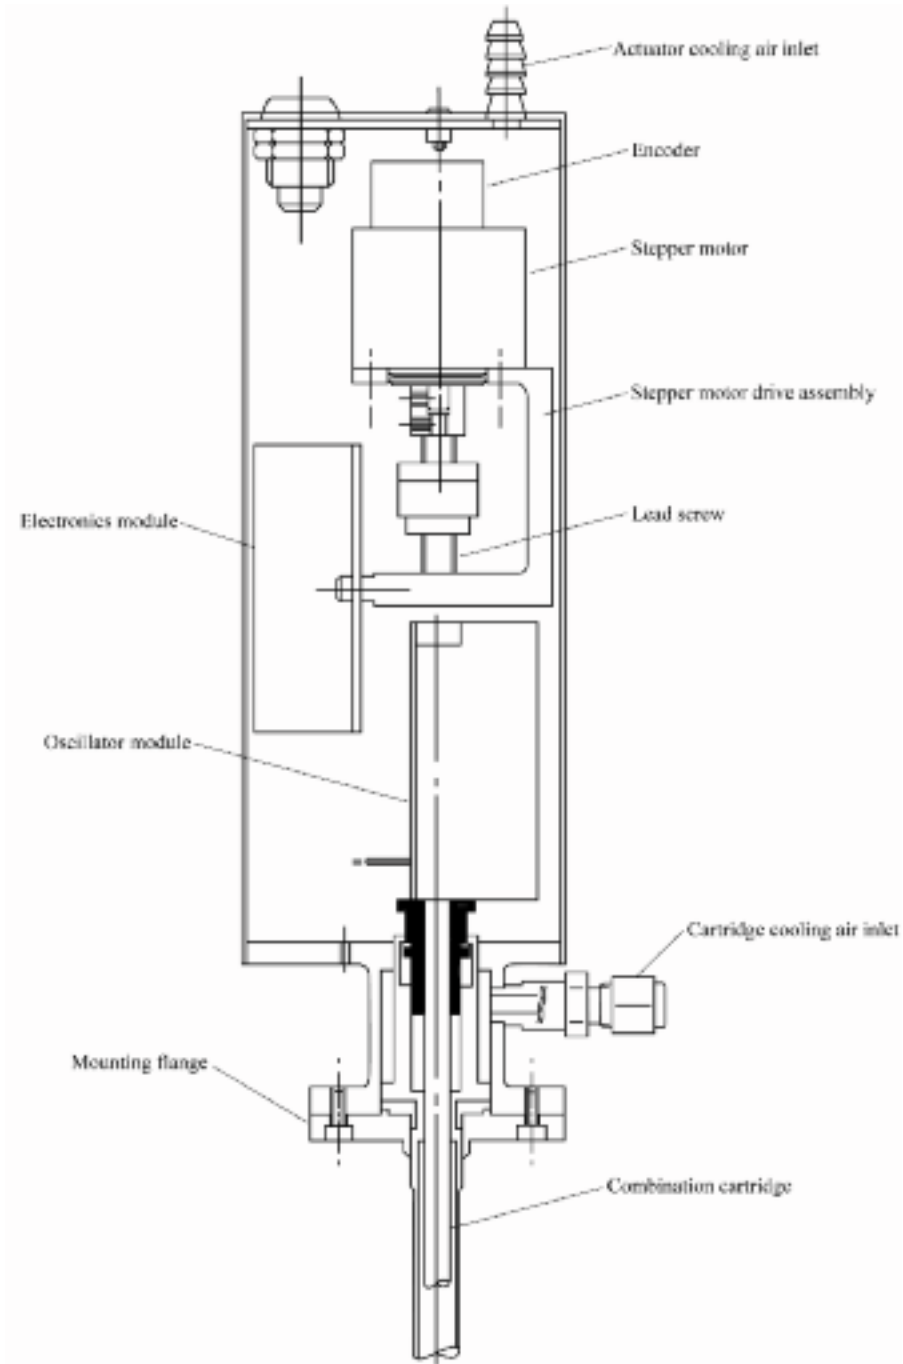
The blade-by-blade electromechanical clearance measurement system actuator and probe.
